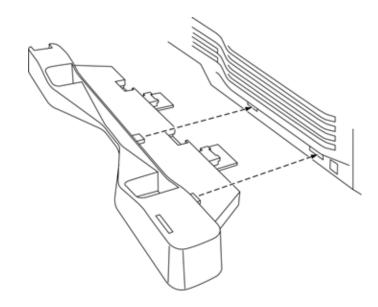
Attach Remaining 9.5" Stand Mount Bracket
